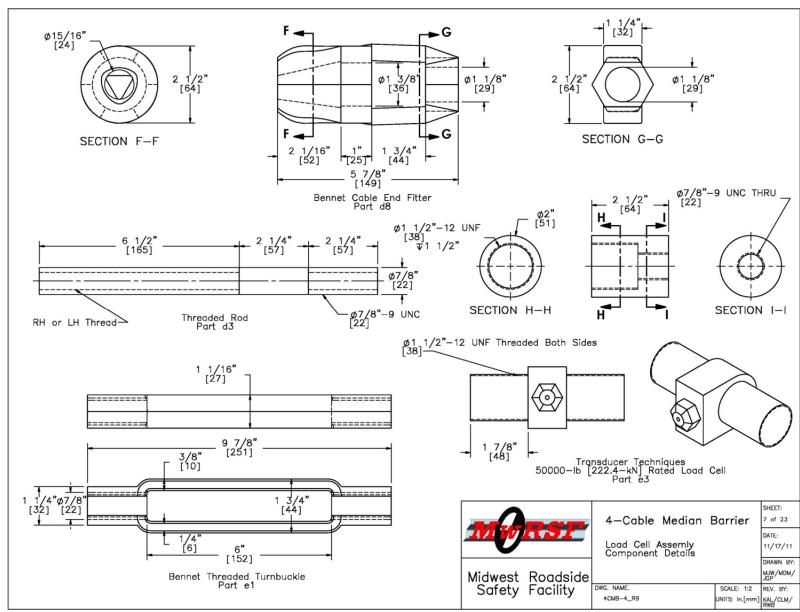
Load Cell Assembly Details, Test No. 4CMB-4
